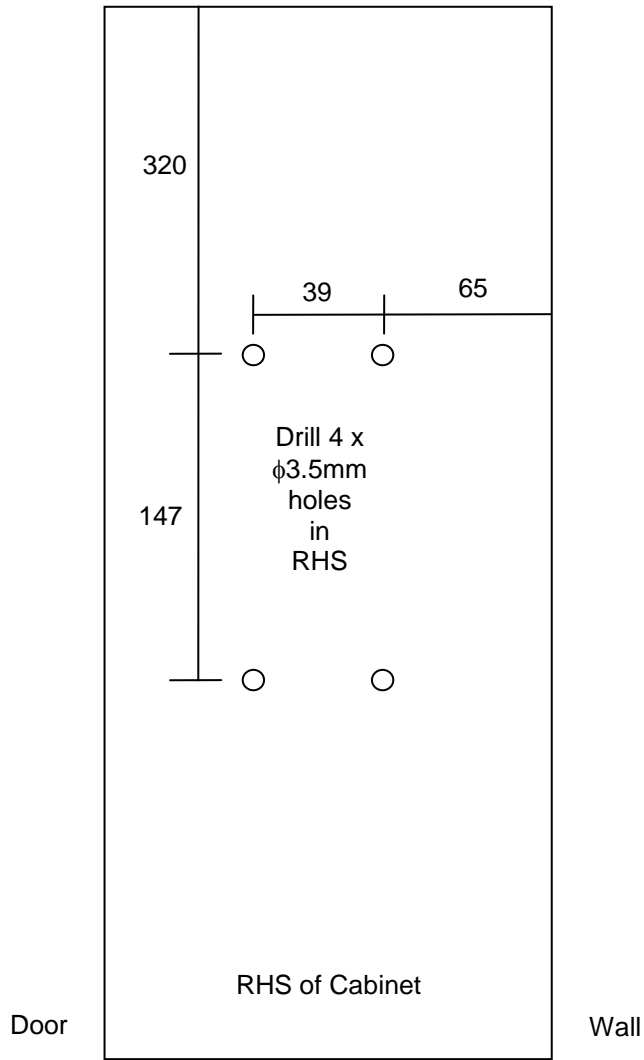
DRILLING DETAIL FOR RACK CABINET
